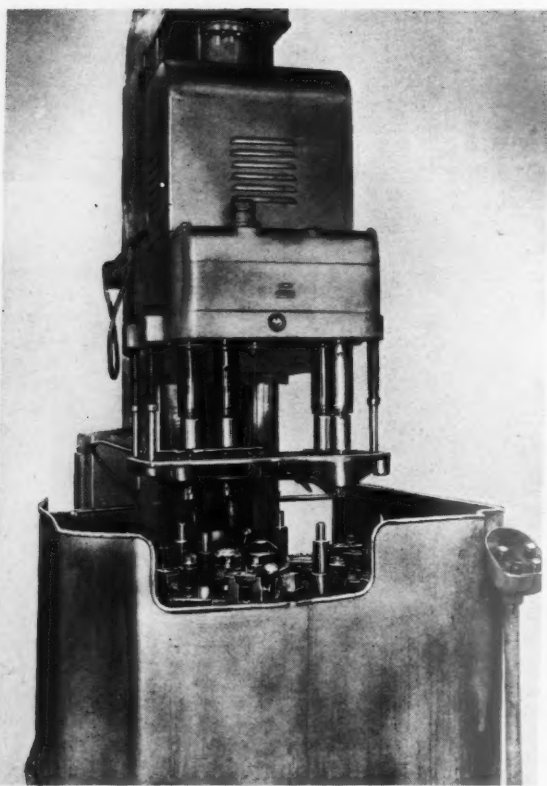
An Archdale machine for rough and semi-finishing the bore of the connecting rod big end
